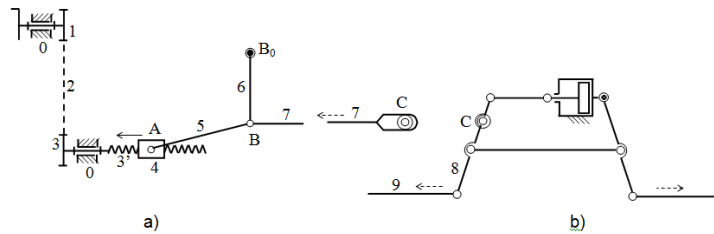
Kinematic scheme of brake mechanism with Gall chain and screw motion
